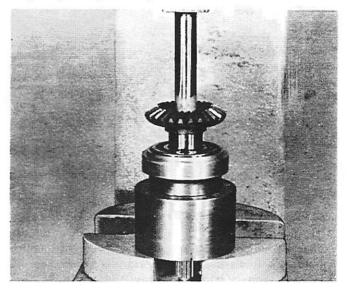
Installing Propeller Shaft Gear Ball Bearing and Retainer
